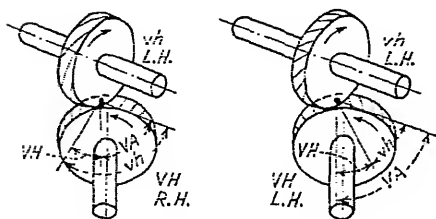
Spiral gearing with helix angles of opposing and similar hands.
